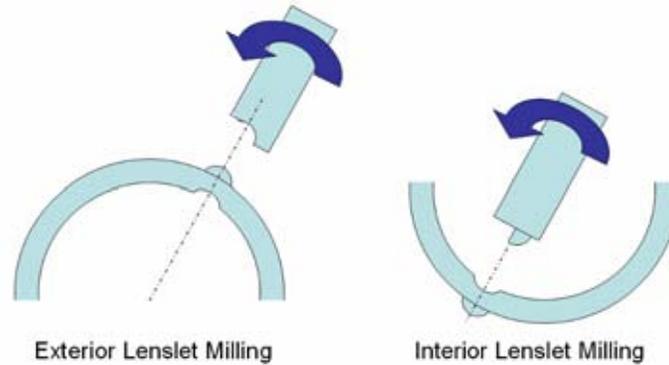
The Corresponding Exterior (left) and Interior (right) Lenslets Are Milled With the Milling Spindle Positioned At The Same Angle on the Indexing Table
